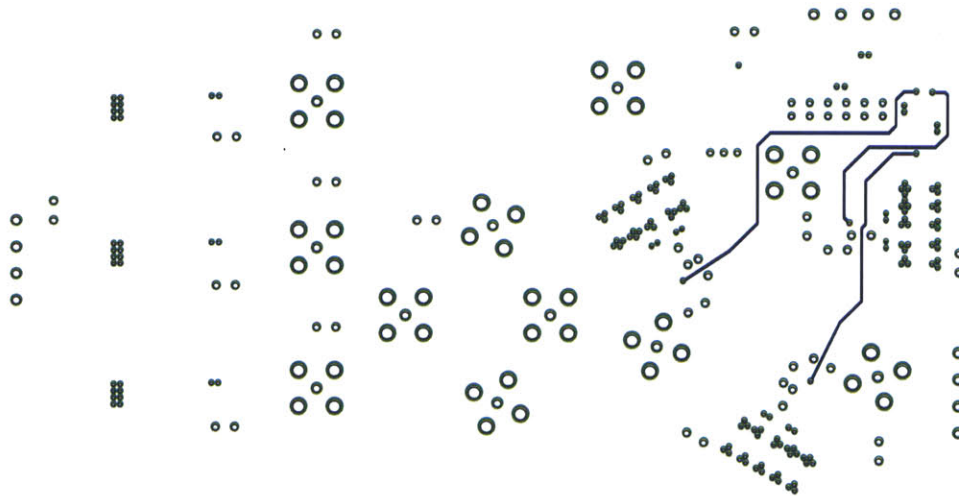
The Layer 2 PCB Layout of the Ac Power Delivery Discrete PCB Prototype.
